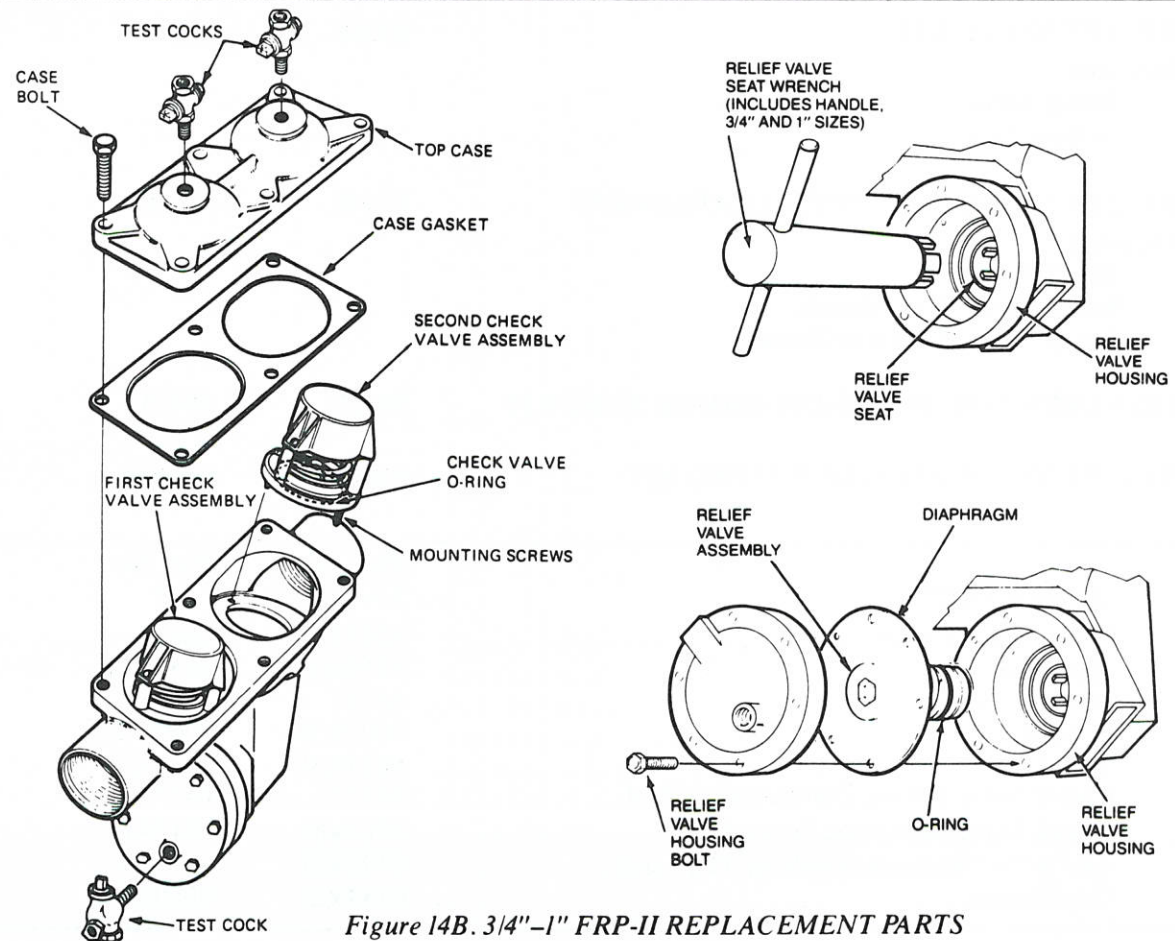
B. 3/4"-1" FRP-II REPLACEMENT PARTS
